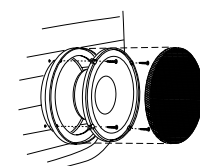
Mounting the GT0606c woofer in a standard 165mm opening.
